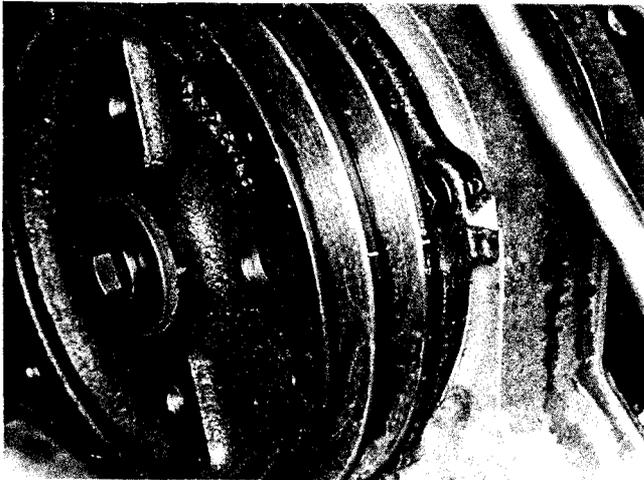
, (V514127). Valve set mark on accessory drive — V-903
